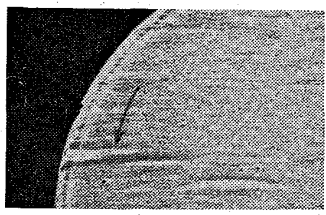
Macro-etched pattern of cross-sectioned surface of tested specimen.
